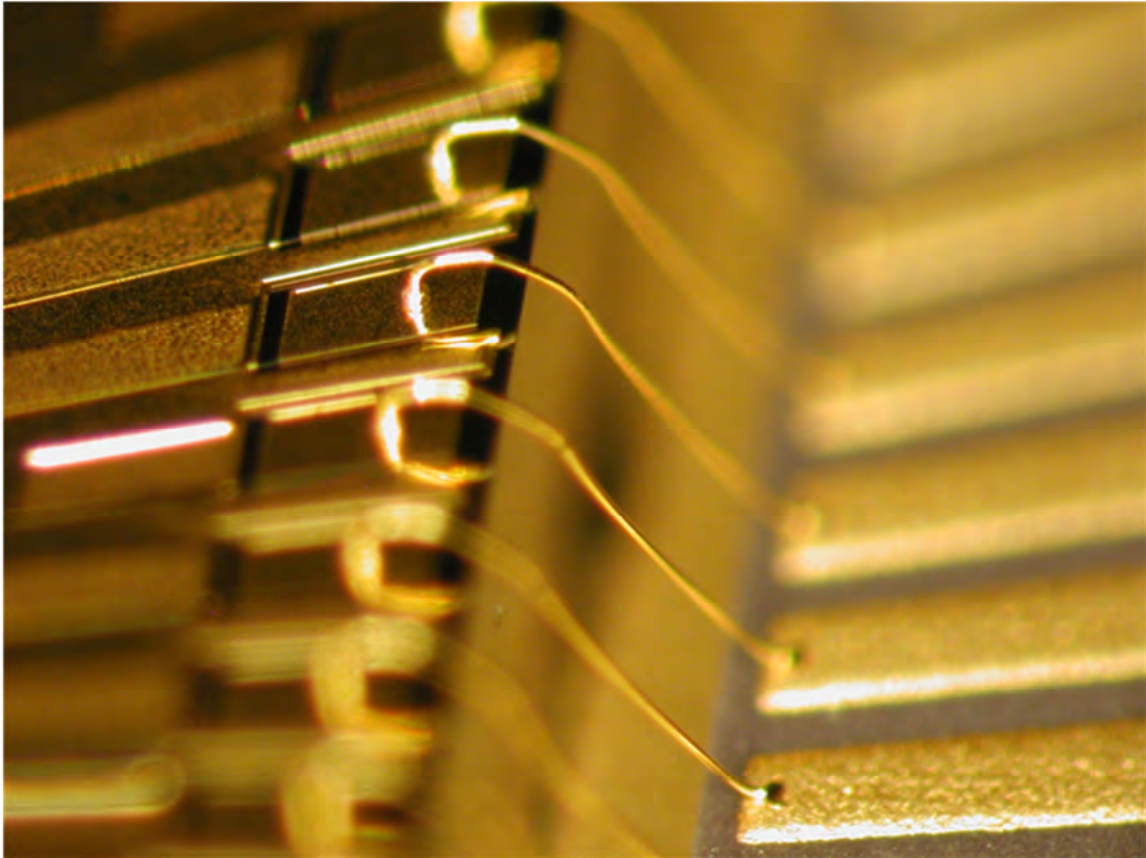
Wire bonder being used to attach gold studs to the interposer.
